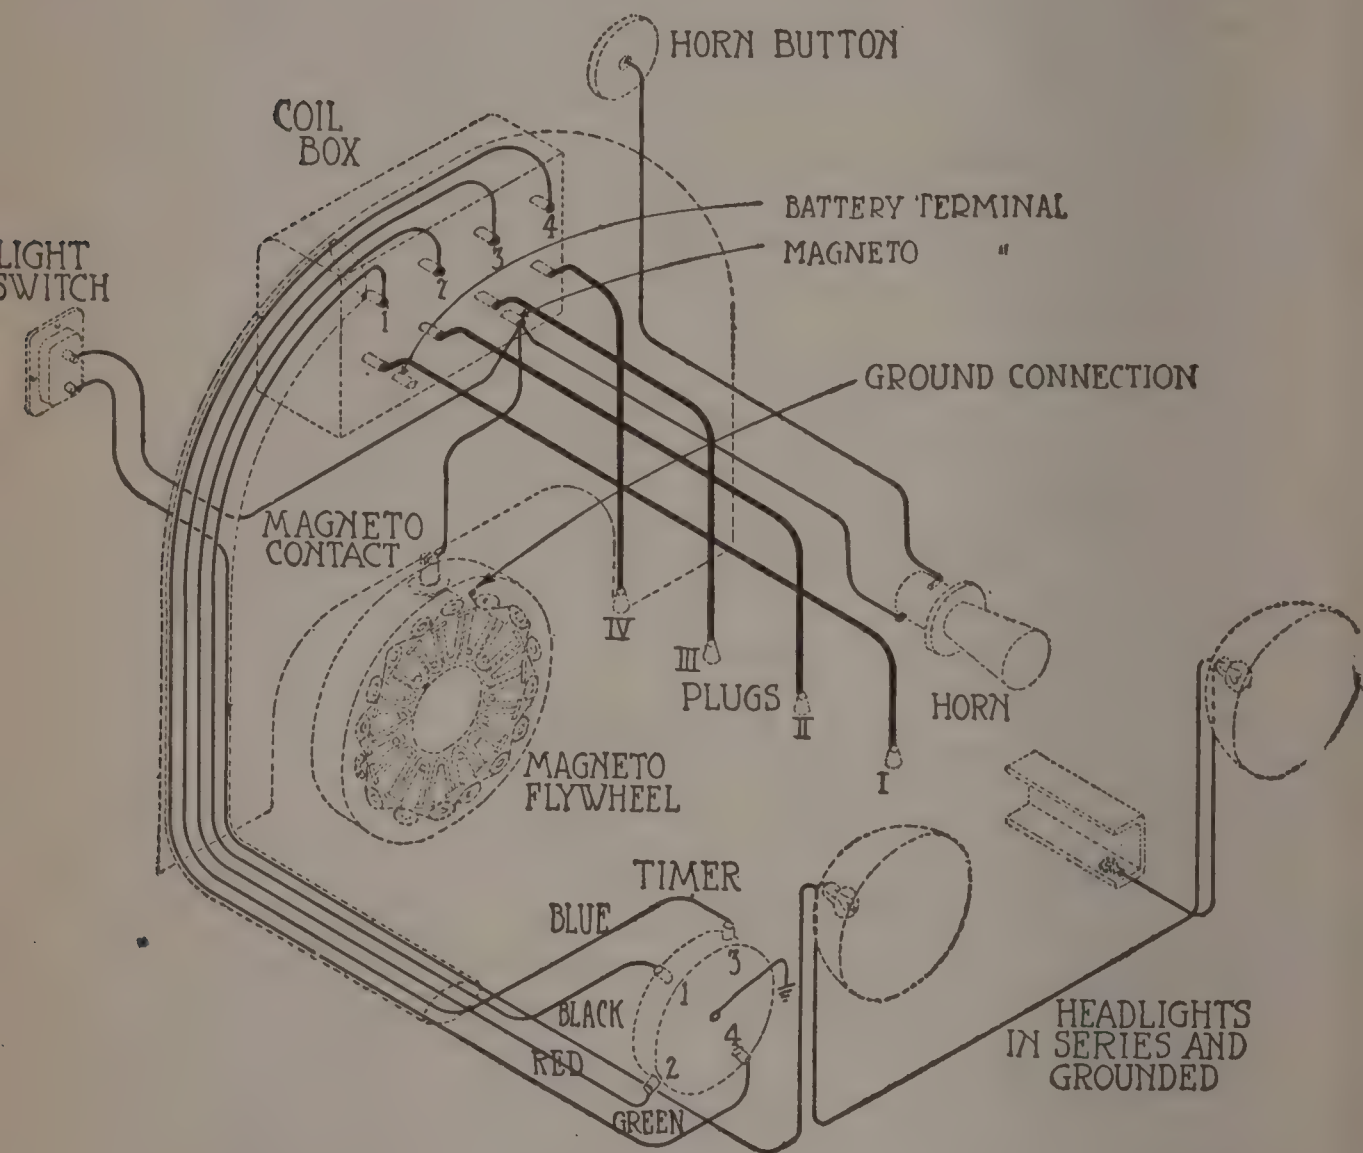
Perspective view of wiring and component parts of Ford standard electrical equipment
